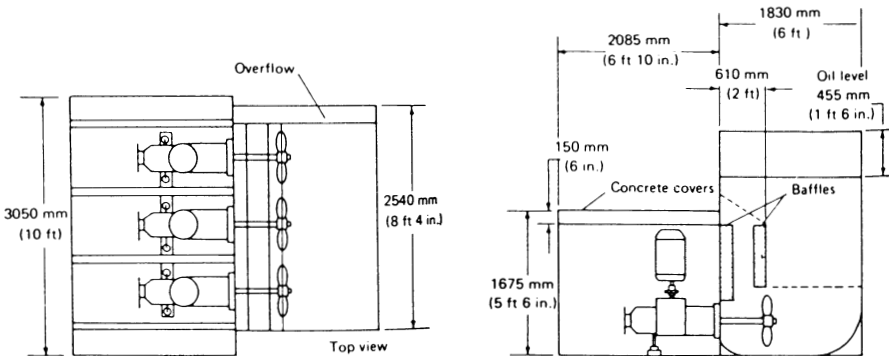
Quench tank equipped with multiple side-entering impellers
